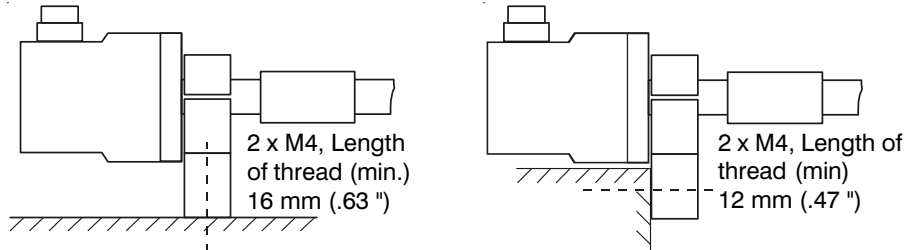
Sensor mounting with mounting kit MBS 12/8
